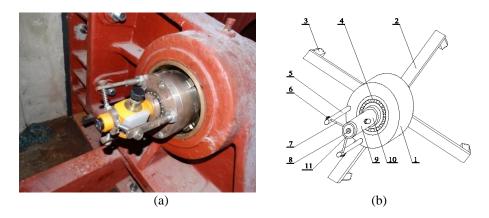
The implemented device: a) view on the mounted device in the sleeve, b) scheme (1 - self-centering, 2 - arms, 3 - steel jaw chucks, 4 - self-aligning bearing, 5 - pins,
